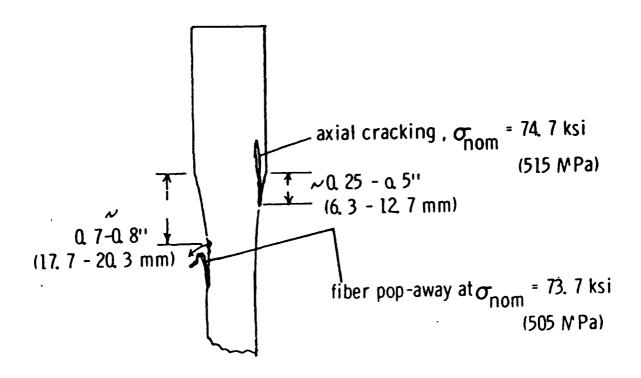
Typical Failures in "Dogbone" Specimen With Some Cross Reinforcements [2]
